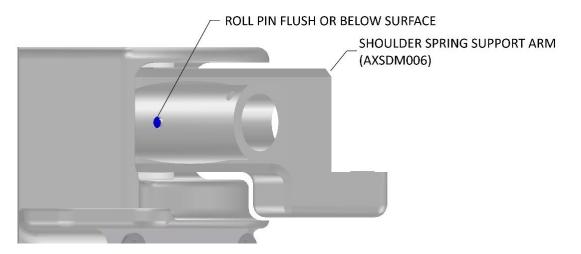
Check 3mm Roll Pin flush or below surface of Shoulder Support Arm (AXSDM006)
